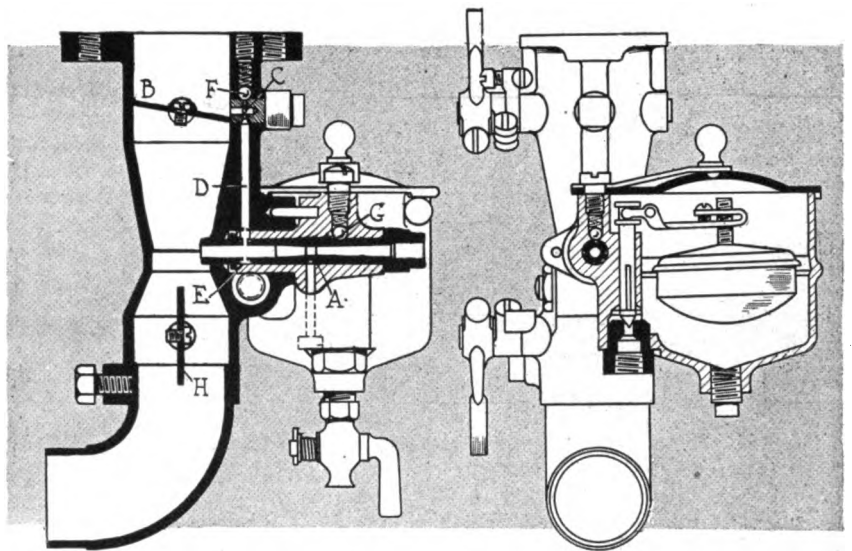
Left—Section through Master carbureter. Right—Illustrating rotary throttle and location of multiple distributing jets. Fig. 3—Detail—Removable multiple jets
